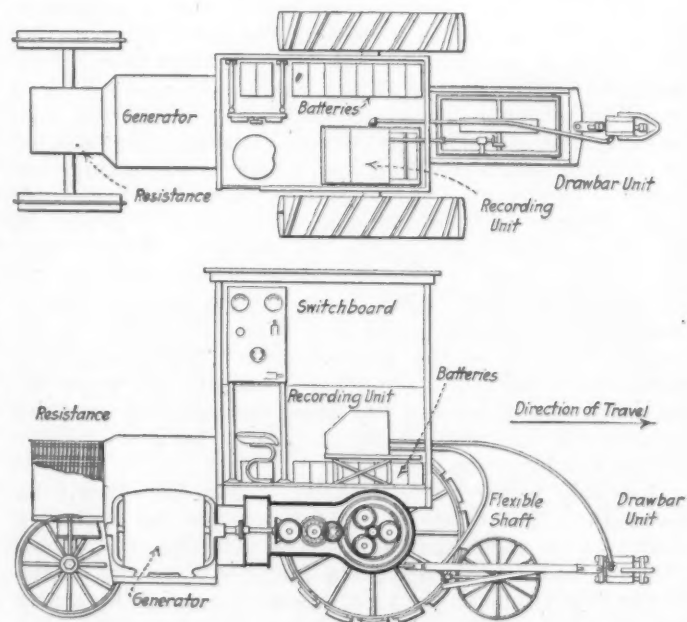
PLAN AND ELEVATION OF TRACTOR TESTING CAR
